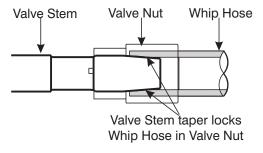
Valve Nut Secured to Valve Stem and Whip Hose.
